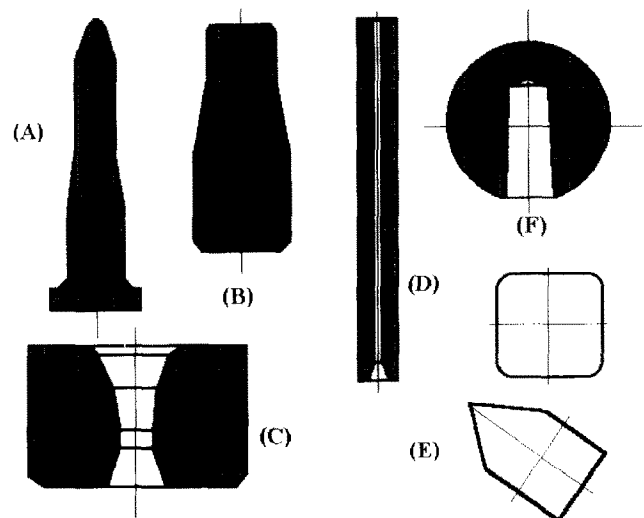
Examples of simple parts and ware manufactured using CIP and green machining.
